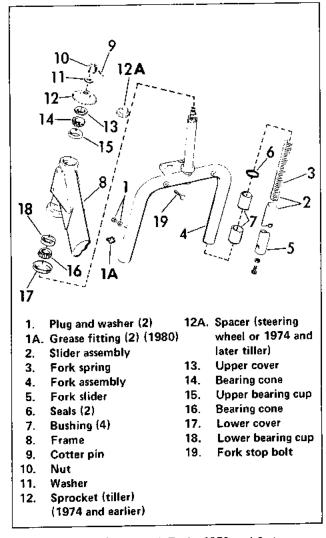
F-78A. Front Fork, 1970 and Later - Exploded View
